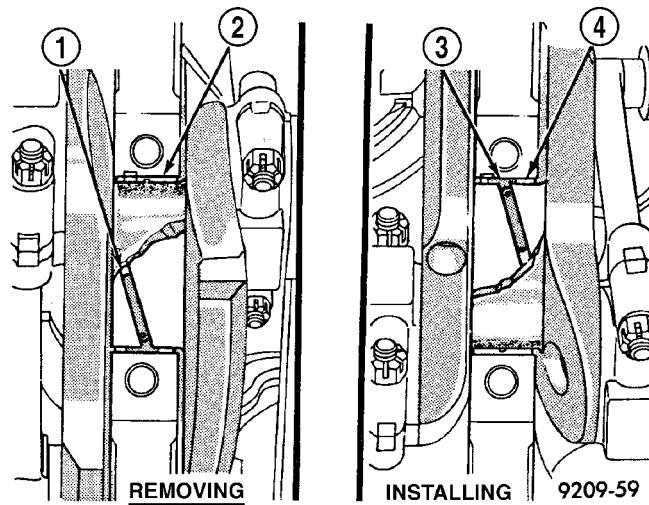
Upper Main Bearing Removing/Installing With Special Tool C-3059
